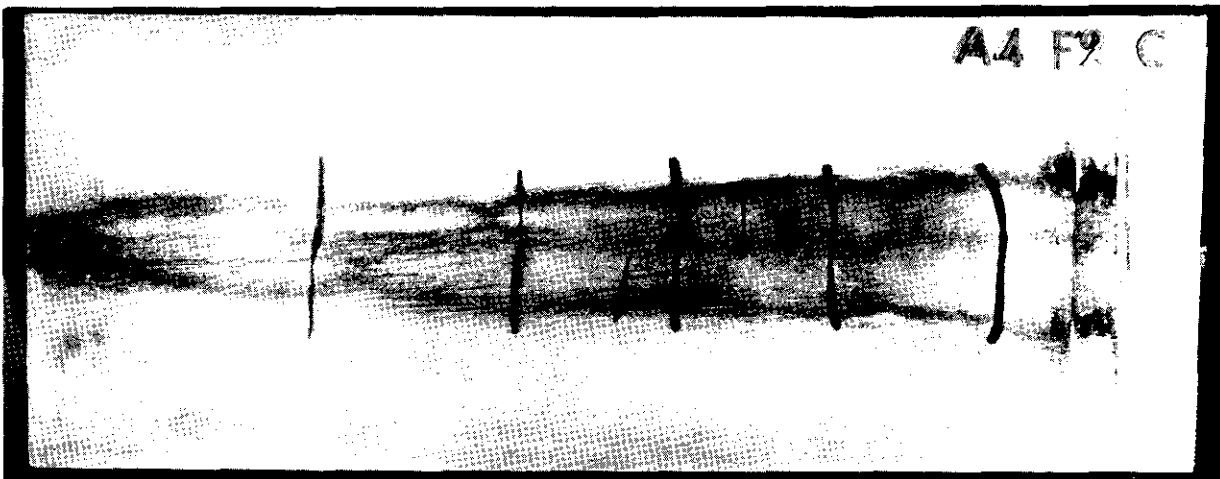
Crack pattern in heavy, continuous fillet-weld Specimen made with SAE 4340 steel.
